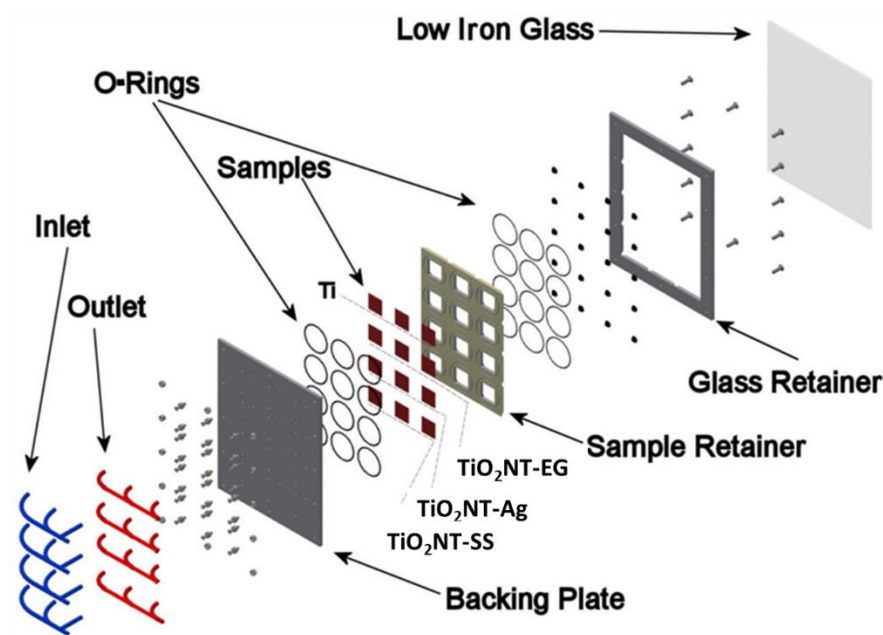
3 Exploded view of sample window assembly. Adapted from [5].
